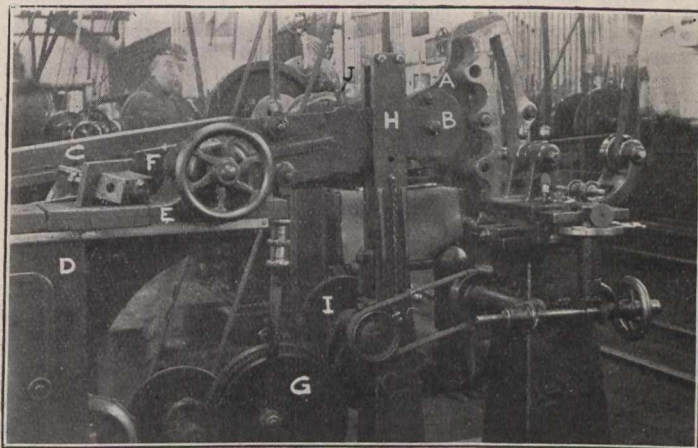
Grinding to Radius the Inner Surfaces of the Link.
